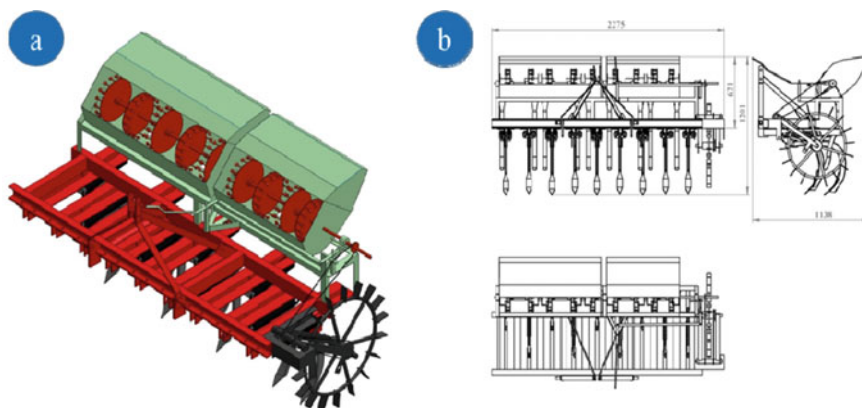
a Conceptual design of the seed drill, b detailed design of the seed drill assembly
